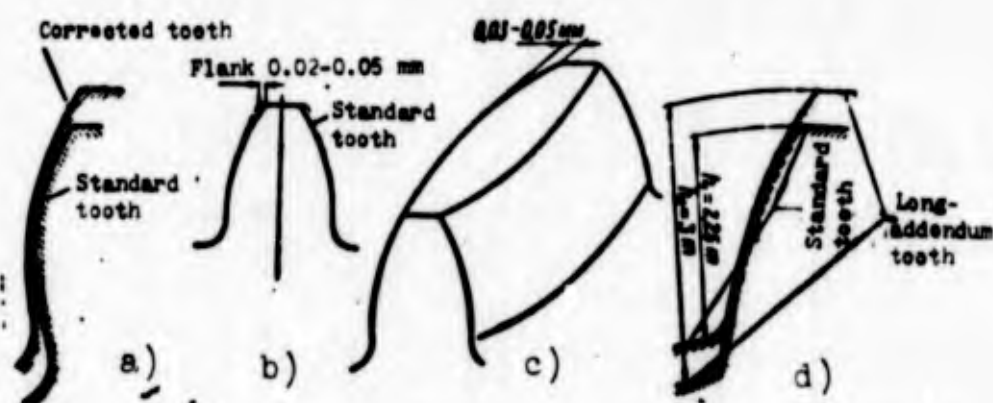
Form of improved teeth. a) corrected tooth profile with positive shift; b) flanked tooth profile; c) elliptoid tooth; d) long-addendum tooth.
